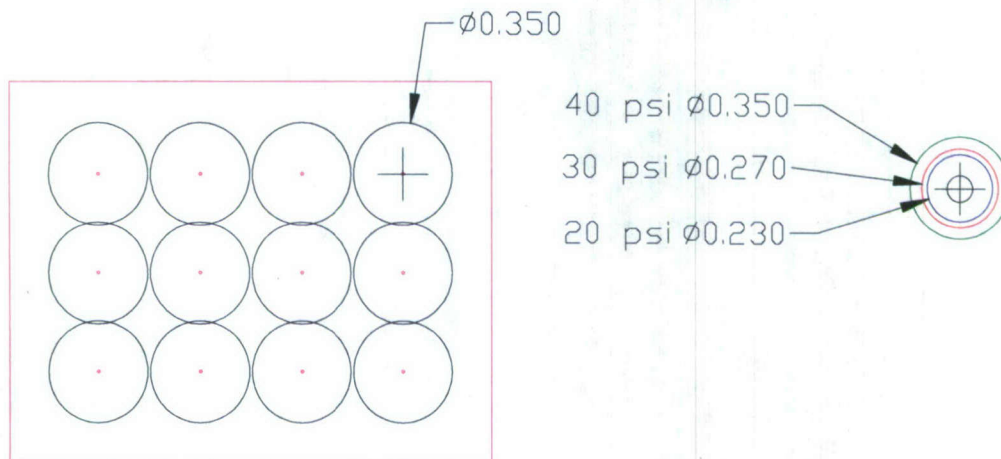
Nozzle plate drawing showing spray pattern overlap design for 40 psi inlet pressure.
